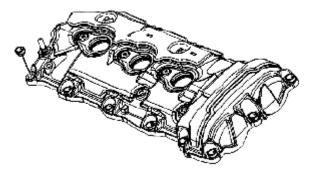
Identifying Left Spark Plug Shield Tube Seals Courtesy of SUZUKI OF AMERICA CORP.
